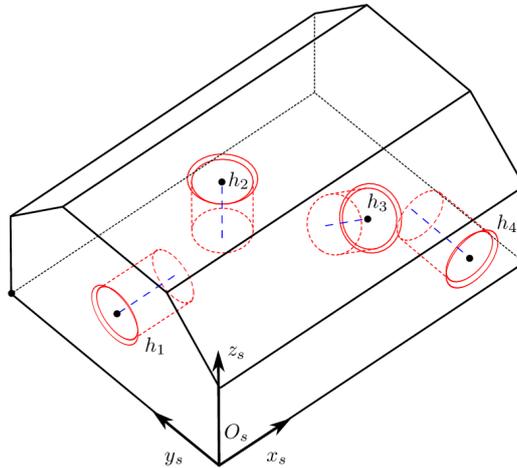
Prototype of the mechanical specimen, illustrating in red lines the used holes.
